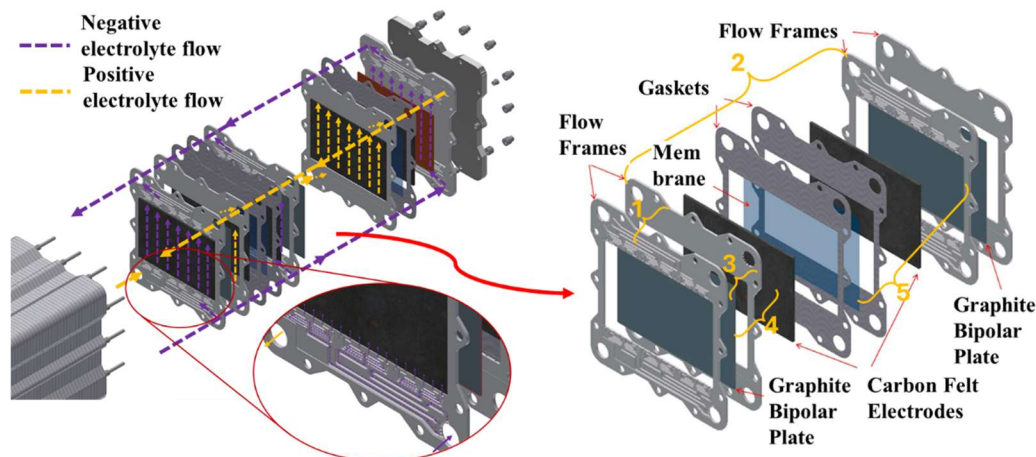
Left: electrolyte distribution in a FB stack. Right: single cell of a FB stack showing the possible joining interfaces achievable through welding techniques: (1–2) between flow frames, (3) between bipolar plate and flow frame, (4) between carbon felt electrode and bipolar plate, and (5) between membrane and flow frame.
